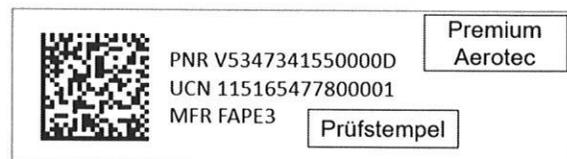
Sample marking standard label incl. square shaped code incl. Date of Manufacturing
